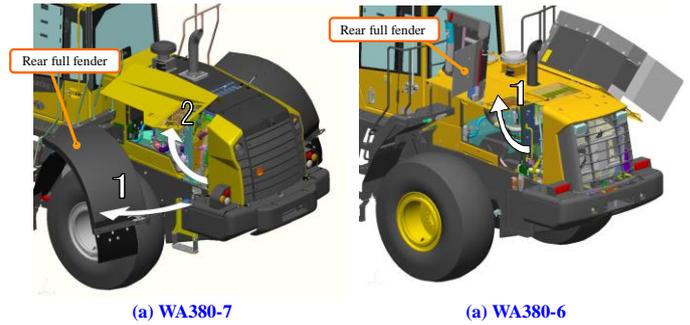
Opening and closing of the engine side door on machines installed with a rear full fender (option)
